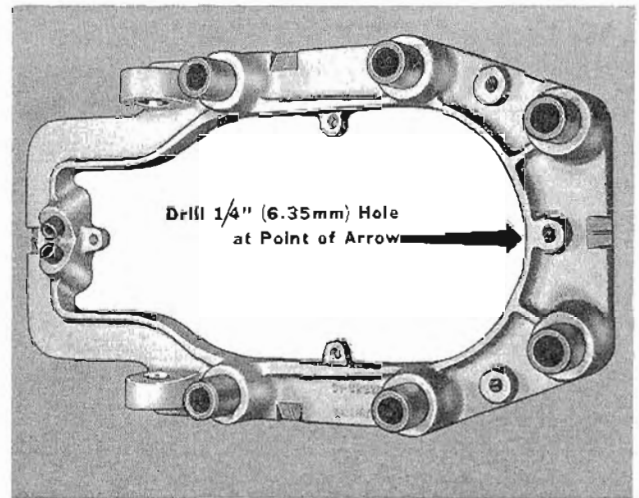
Location of Hole to Be Drilled When Using C-91-32924A1 Transom Drilling Fixture
